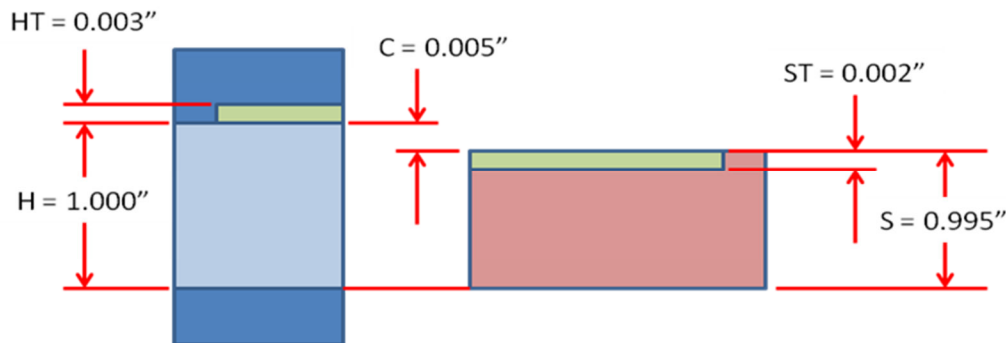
Precision Assembly between a Hole and a Shaft [Y]
